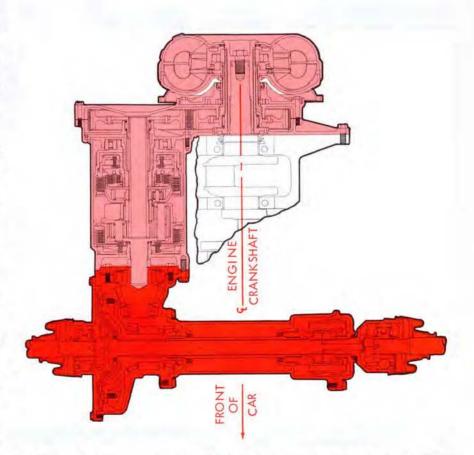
TORQUE CONVERTER, TRANSMISSION PROTOTYPE CONFIGURATION. The engine crankshaft was extended to provide space for a chain drive placed between the converter turbine and the transmission, which was placed on the right side of the engine.
